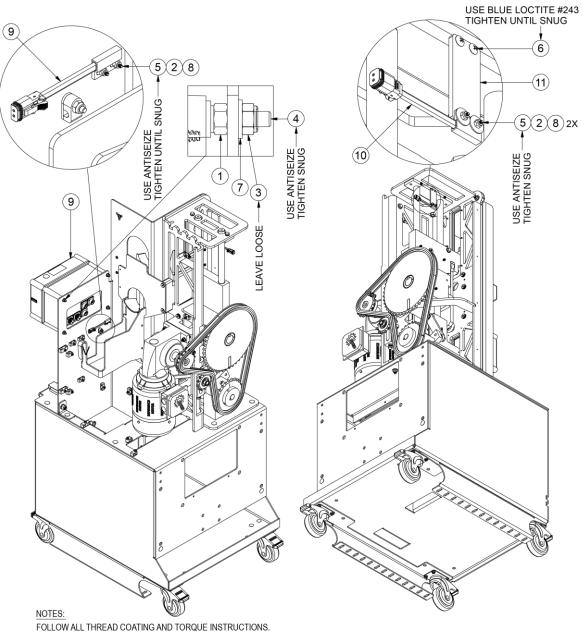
HMI Mounting, Proximity Sensors for Float and TDC
